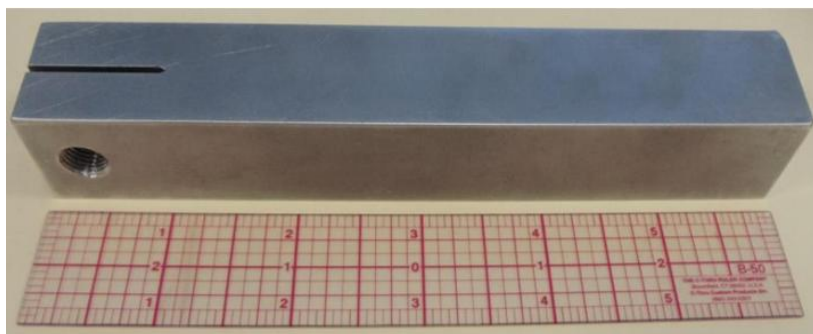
Double Cantilever Beam Test Specimen with ruler in inches
